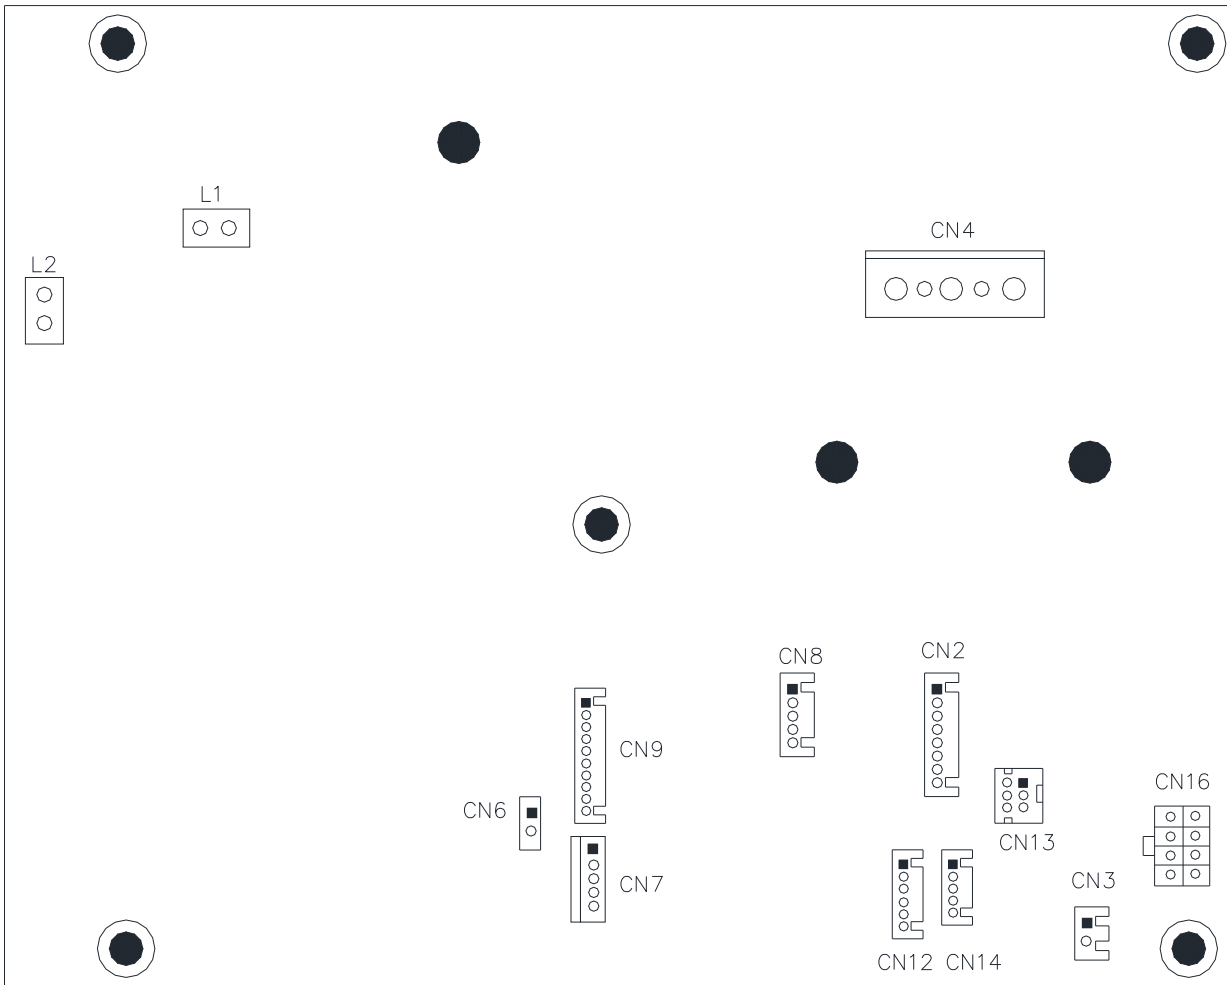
B (圖一 B) SV-860E CTL BOARD Connector
